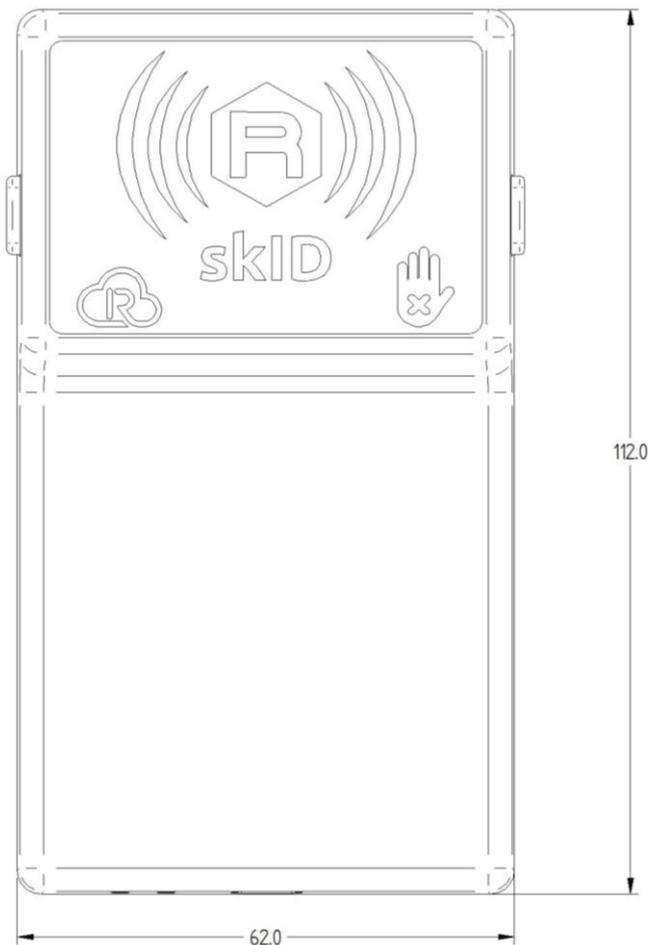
skID R1280I Technical Drawings – Front panel view
